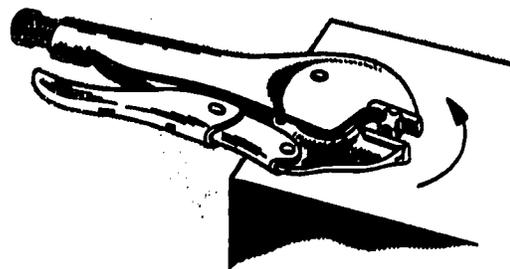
Removing broken bolt and retapping hole to larger size.
